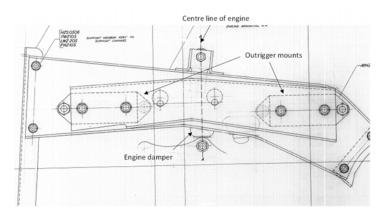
Outrigger engine mounts, Austin 1800, ADO17.
